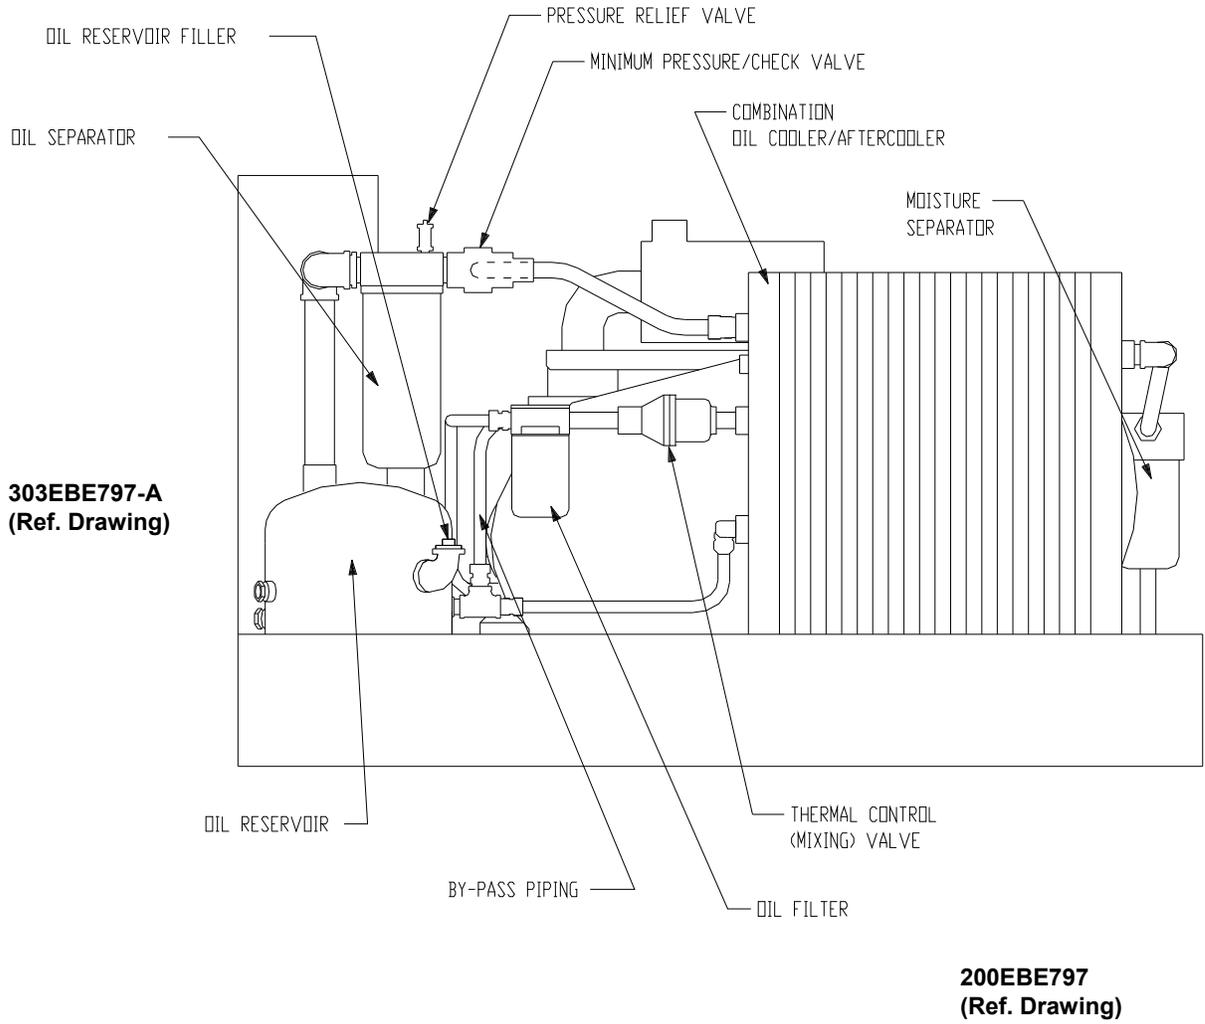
PACKAGE – MINIMUM PRESSURE/CHECK VALVE SEPARATOR & OIL FILTER
